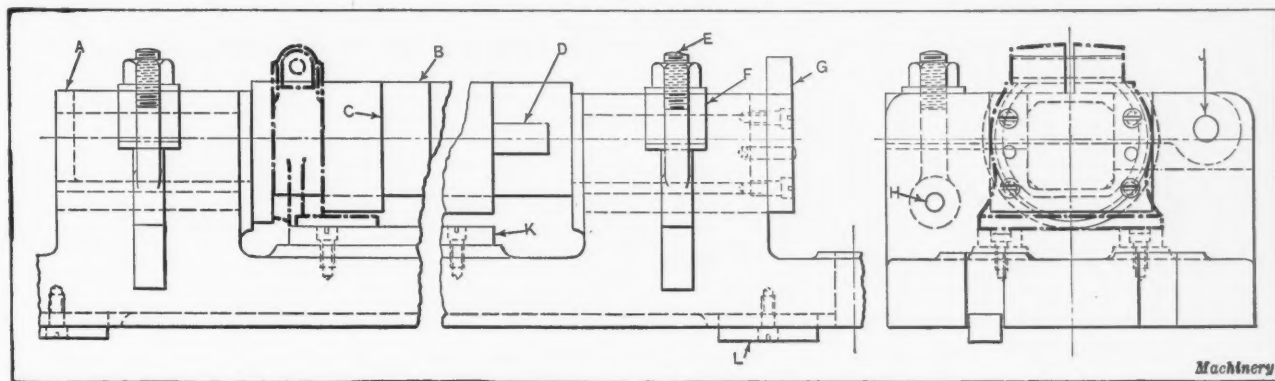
Fixture used for slotting and milling Sides of Fan Bracket Boss
